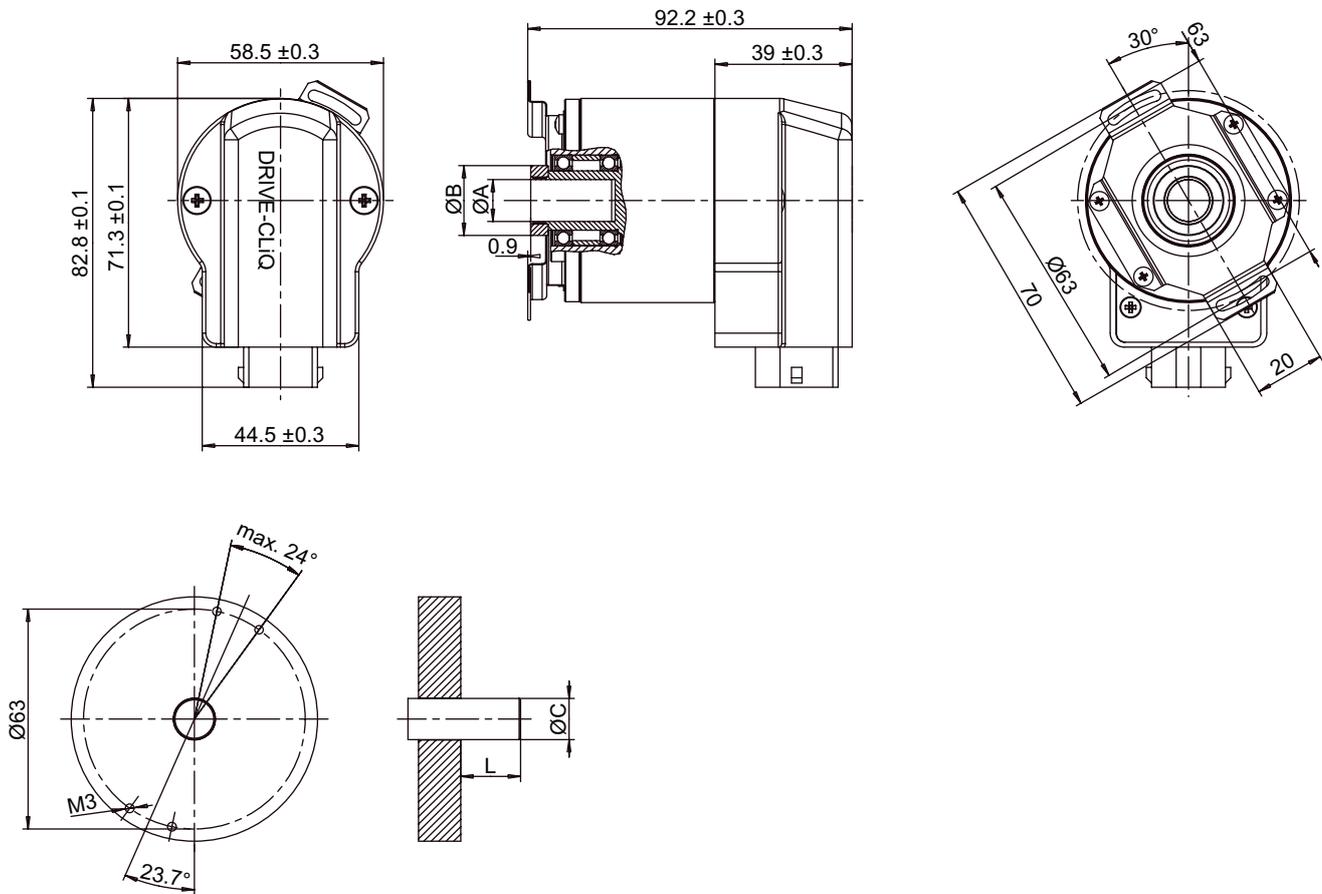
Dimension drawing: Hollow shaft with blind bore
